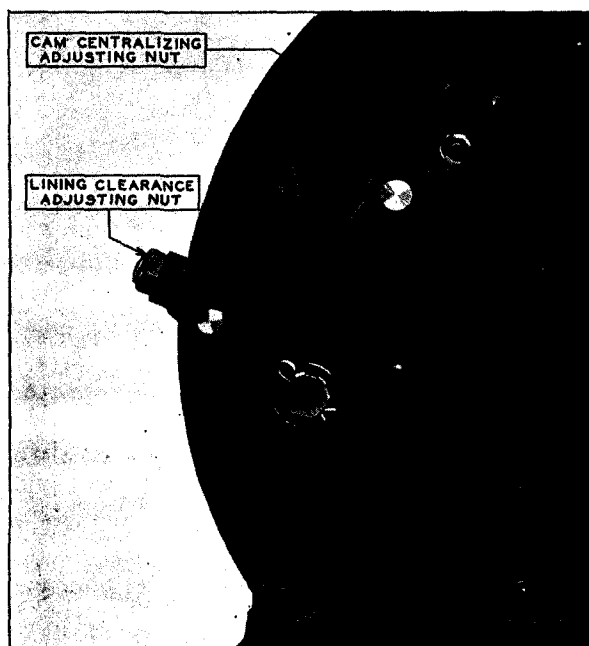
Front brake dust shield, showing adjustments. The adjusting nuts are located similarly on the rear brakes.
